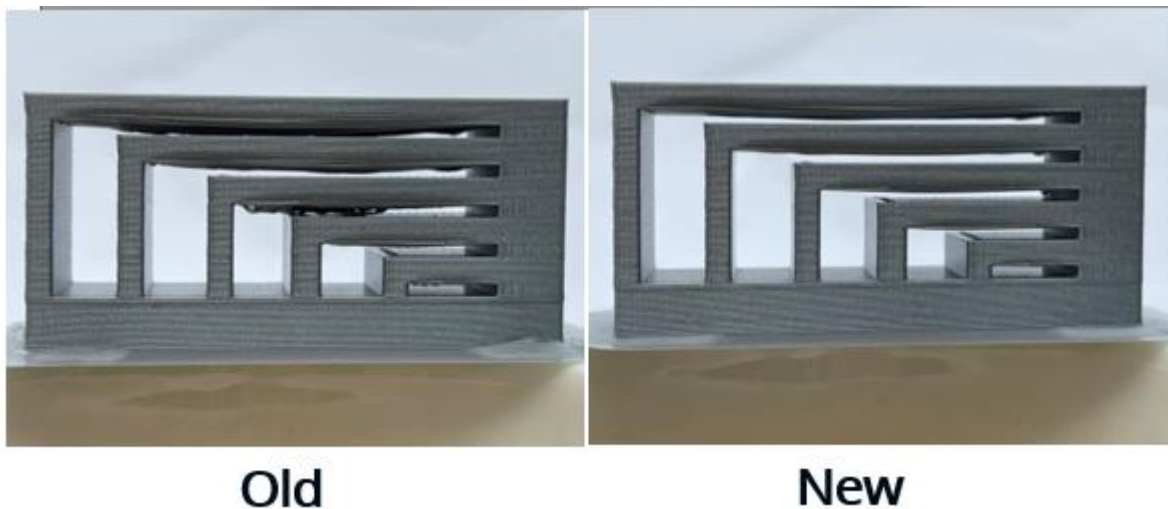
Printed test object using the old settings (left) and the new settings (right)
